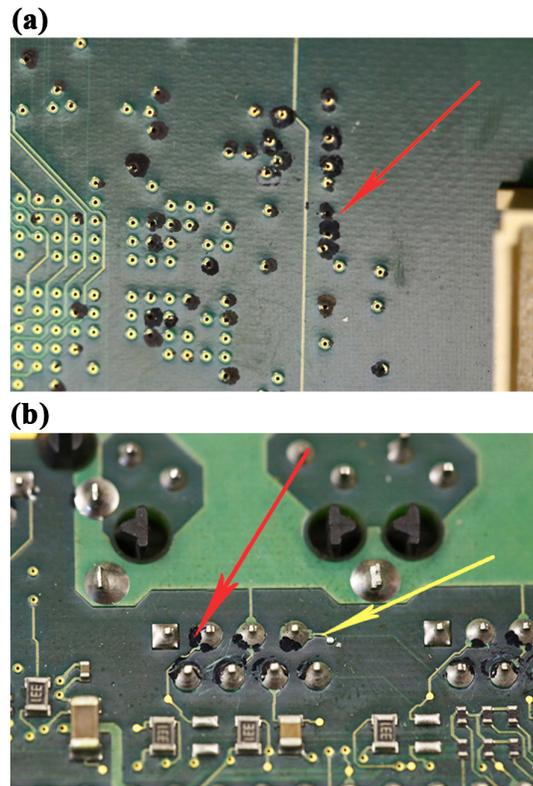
Macrographs of the PCB's surface after corrosion exposure, in the vicinity of ENIG-plated vias (a) and solders (b).
